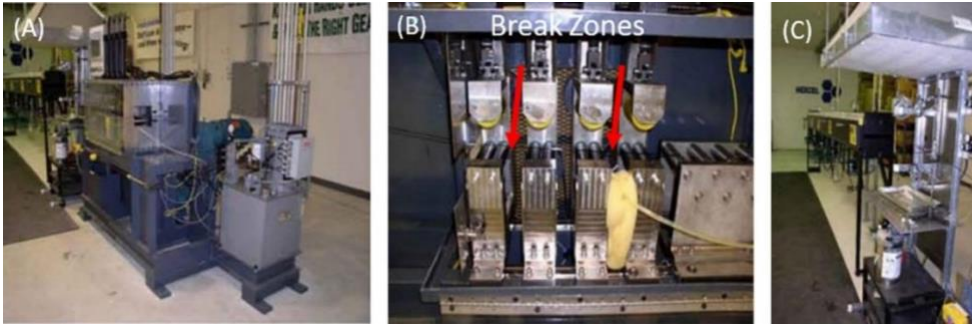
(A) Hexcel stretch breaking machine (B) Breaking zones on stretch breaking machine (C) Sizing application station on stretch breaking machine [2]
